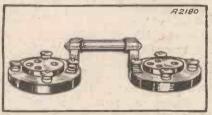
This shows a good method of mounting a tubular resistance or condenser of the clip-in type between two valve holders.
